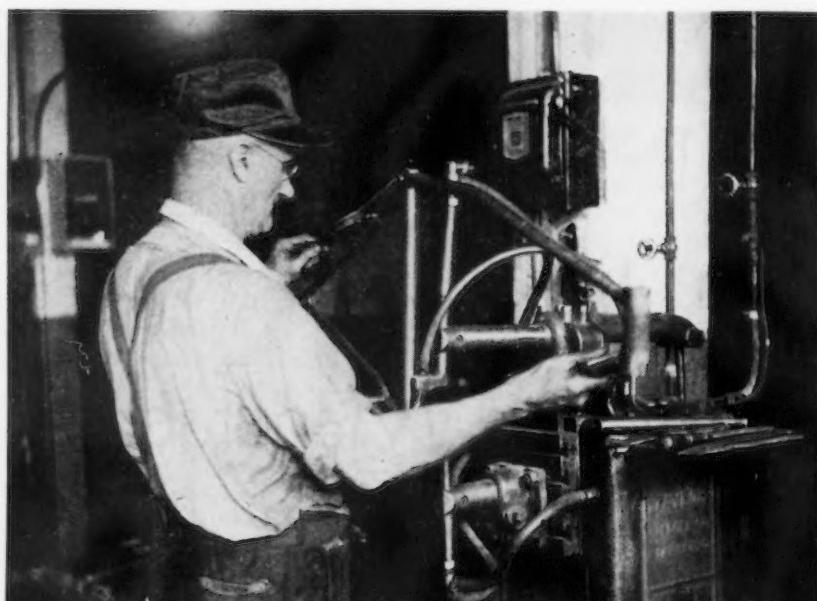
With the members in place, various parts of the frame are spot welded.
